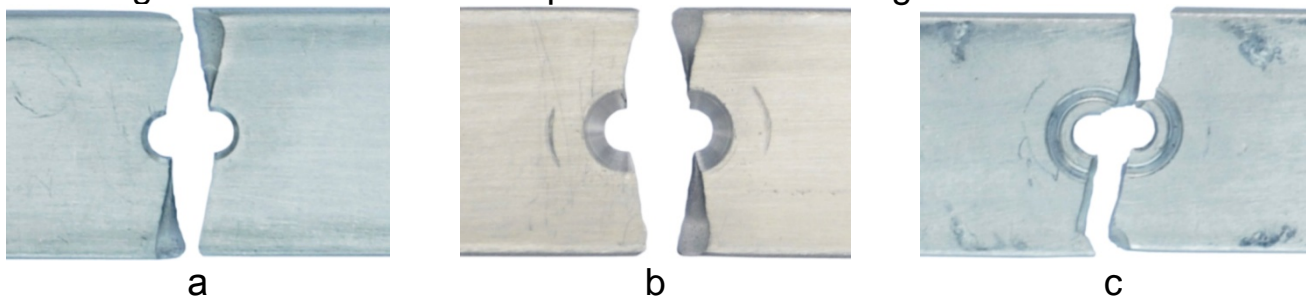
Fatigue Failure Nature of Test-Pieces: a – strip with cylindrical hole; b – strip with cylinder-conical hole; c – strip with cylinder-conical hole processed in hole area by circular barrier reduction
